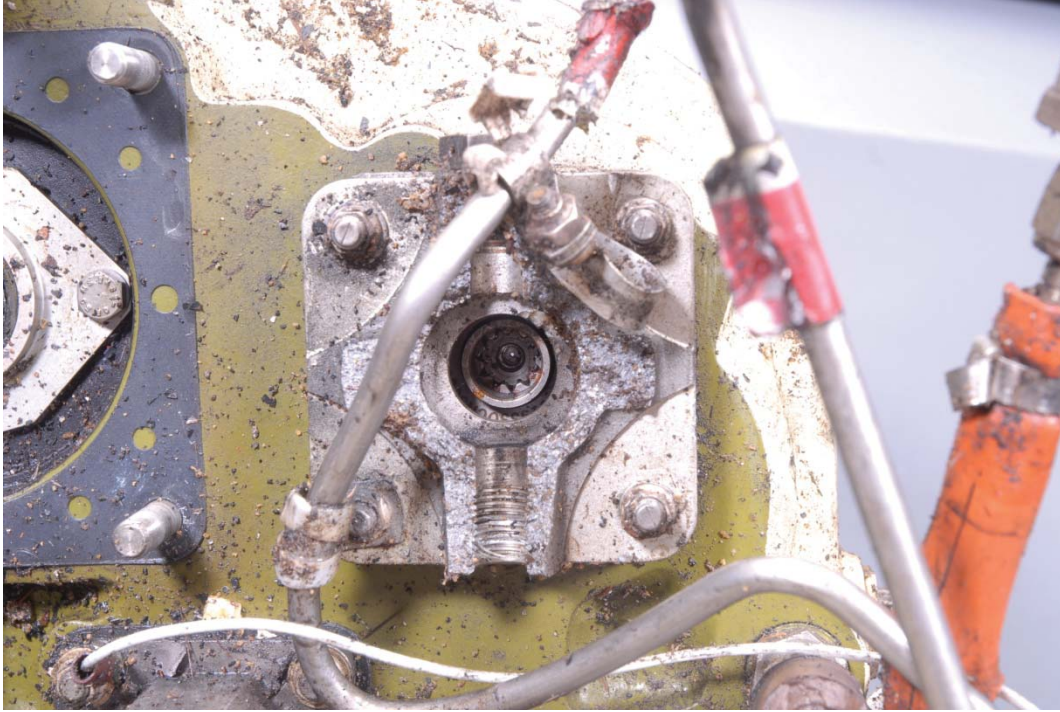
P-79297C, Starter/Generator Fractured Input Shaft
